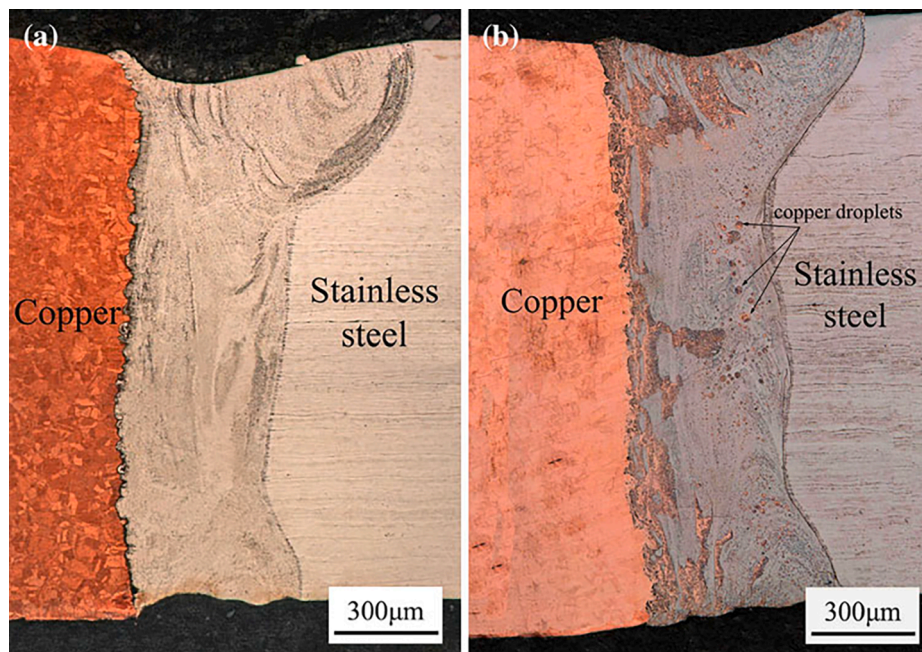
(a) “welding-brazing mode” (beam inclination 0.2 mm towards steel), (b) “fusion welding mode” (without beam inclination) in laser welding of copper and stainless steel [53].
